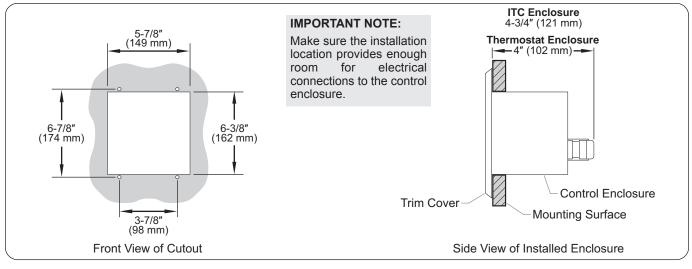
Remote Mounted Control Enclosure Installation Dimensions
